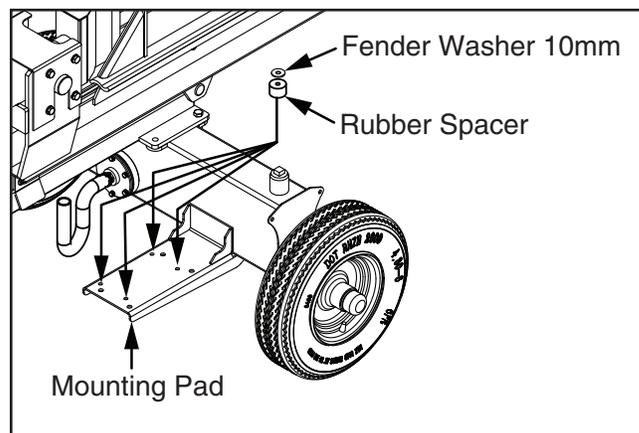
Installing rubber spacers and flat washers onto motor mounting pad.
